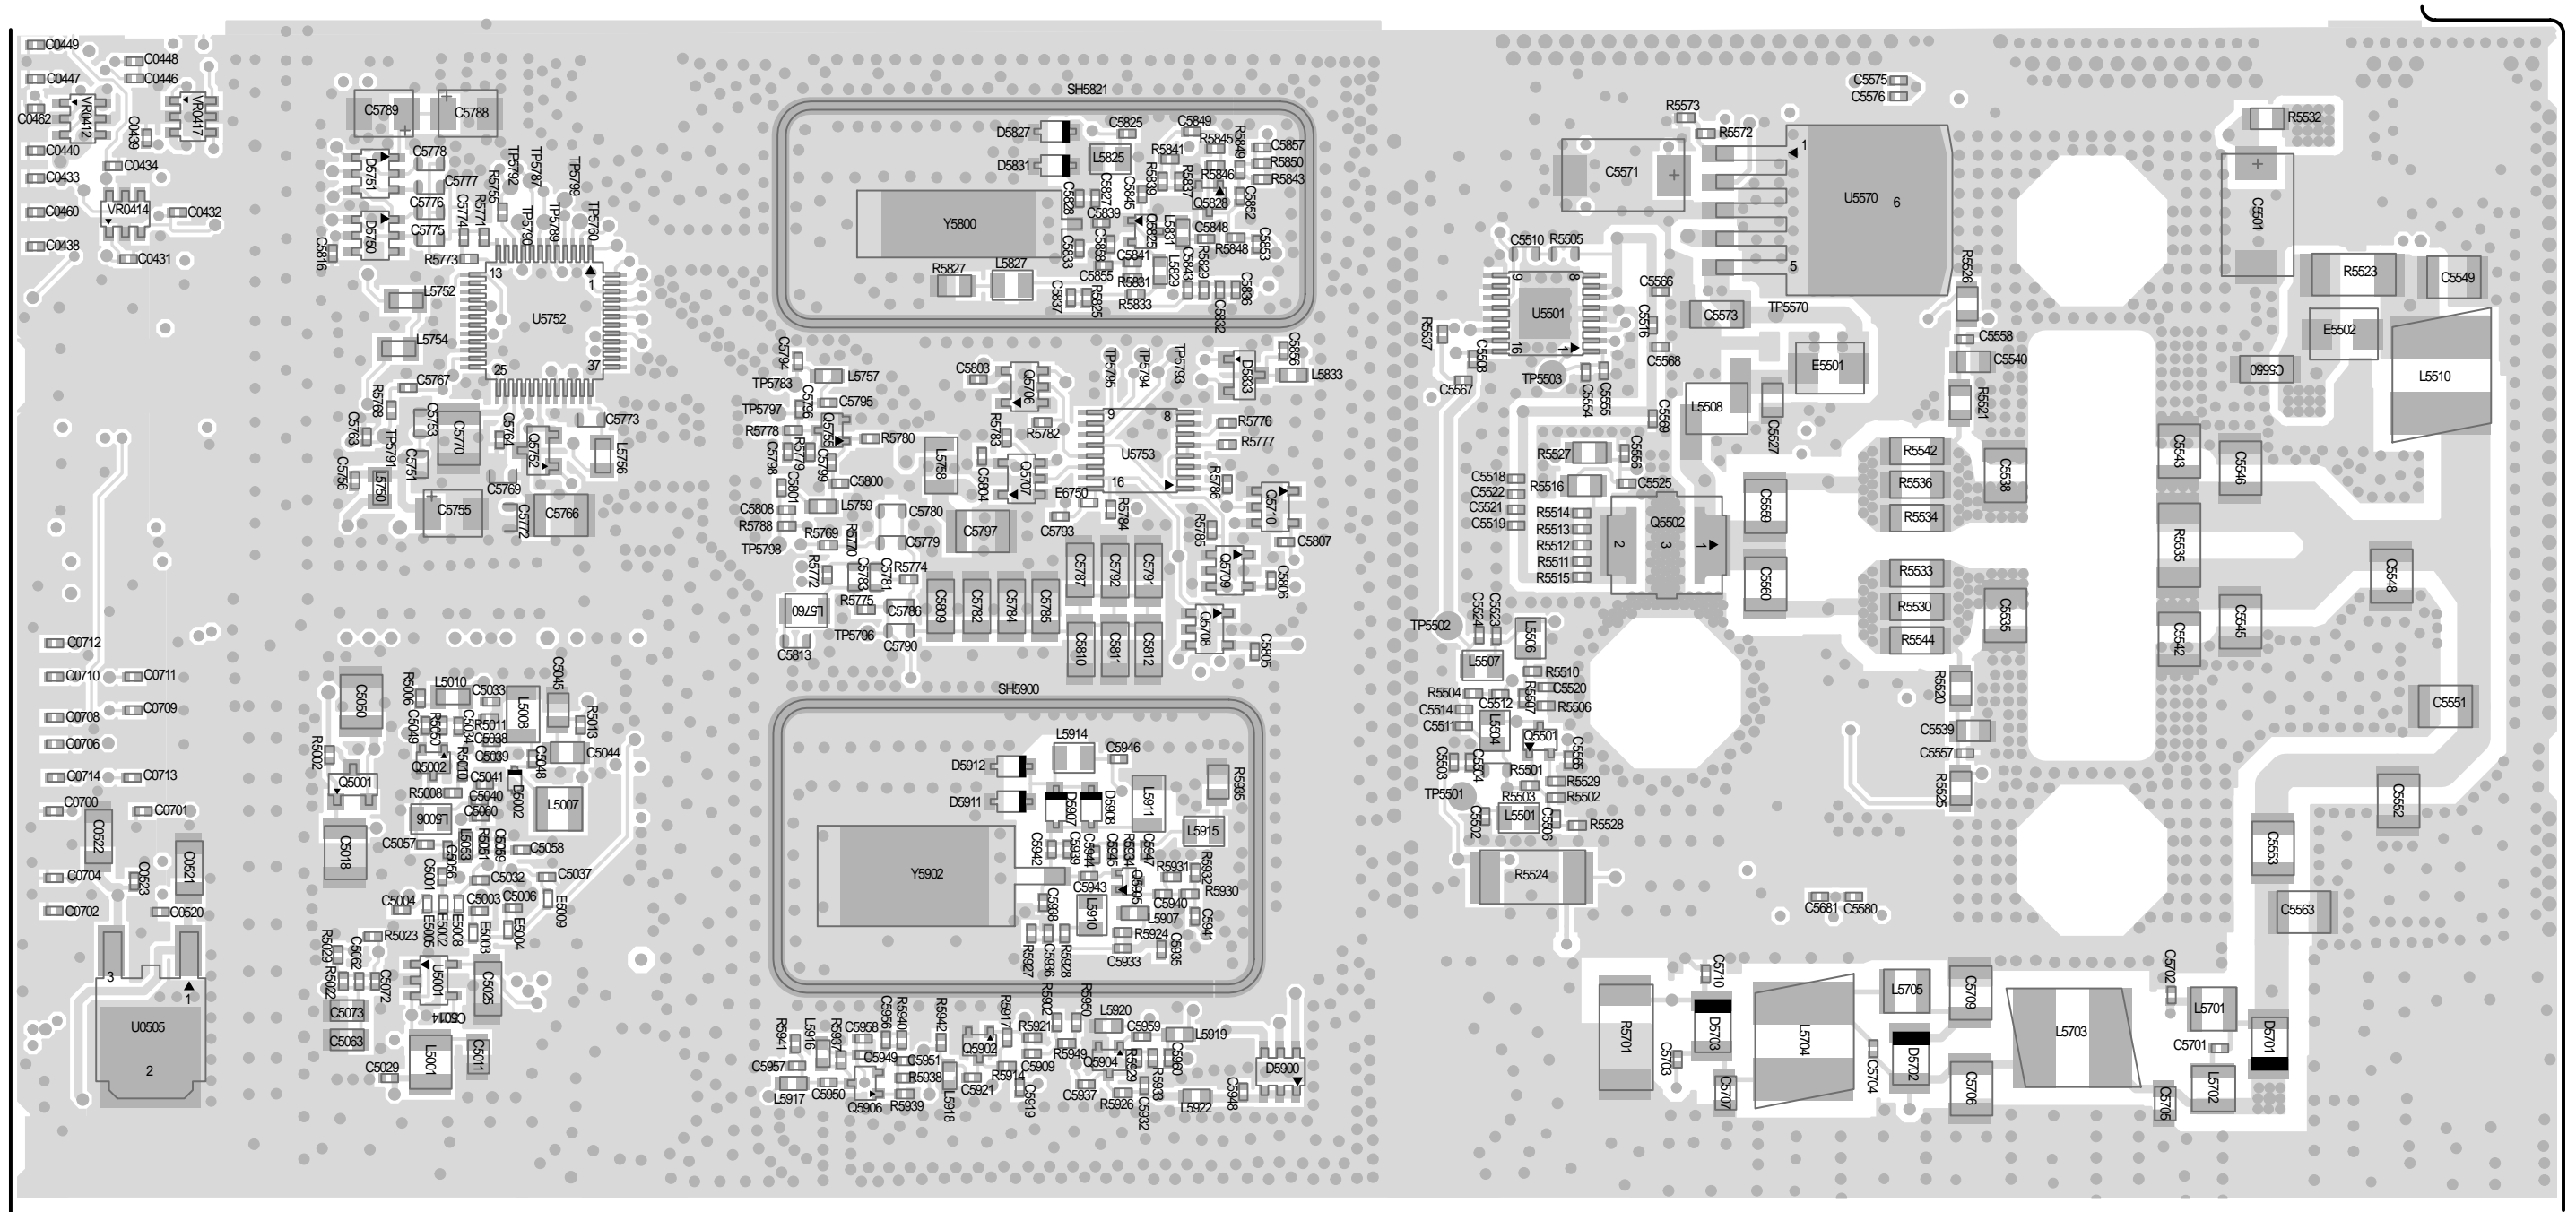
HUE4040A Main Board Layout—Side 2 Middle
